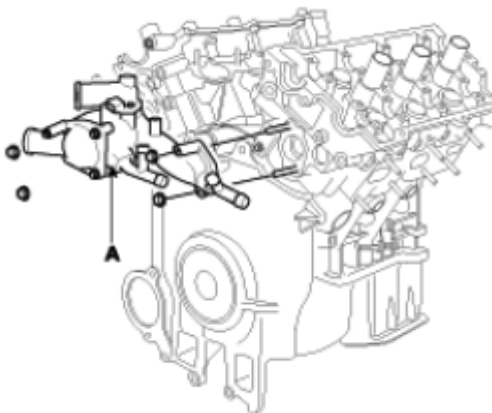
Identifying Water Pipe And Water Temperature Control Assembly With Mounting Screws
